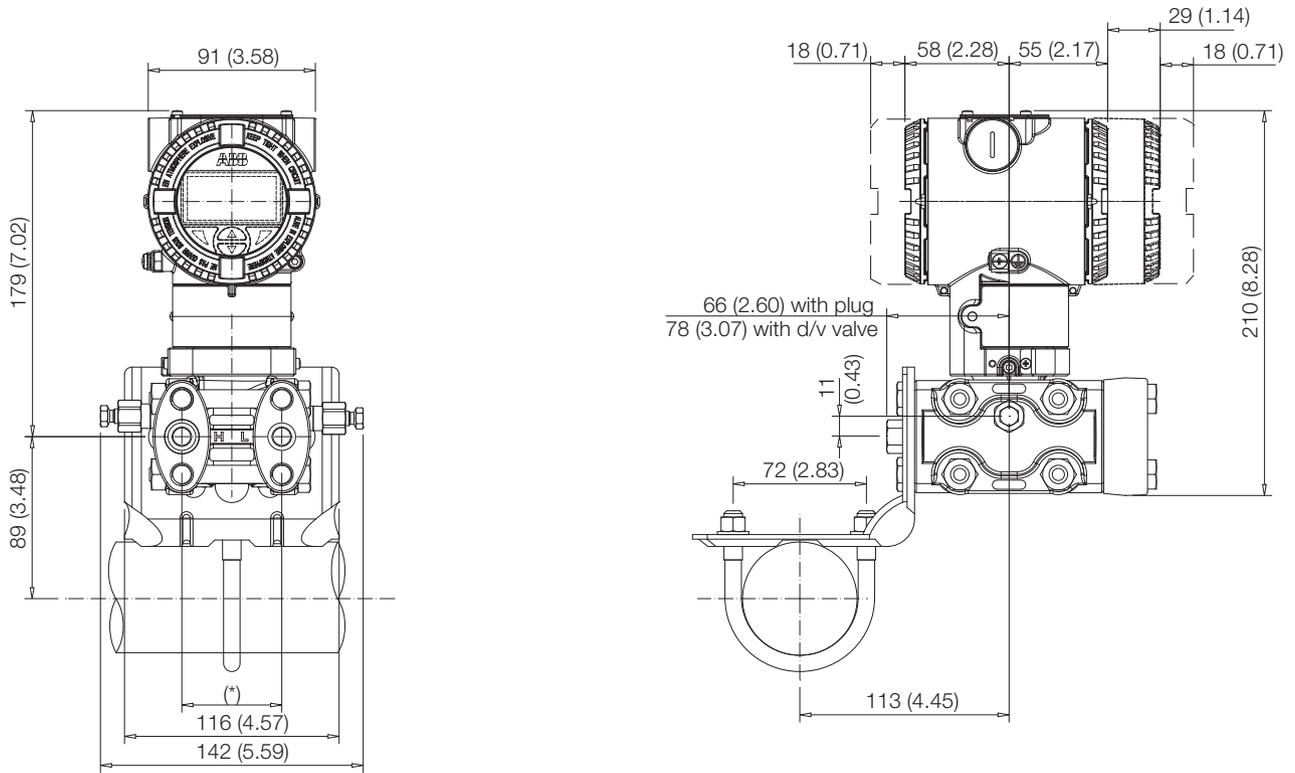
Differential Pressure Style transmitter with barrel housing installed on a horizontal pipe with optional bracket (B2)
